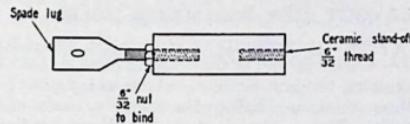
A "pee-wee" screwdriver that you can make from parts out of your junk box. It's just right for getting into those tight corners.
